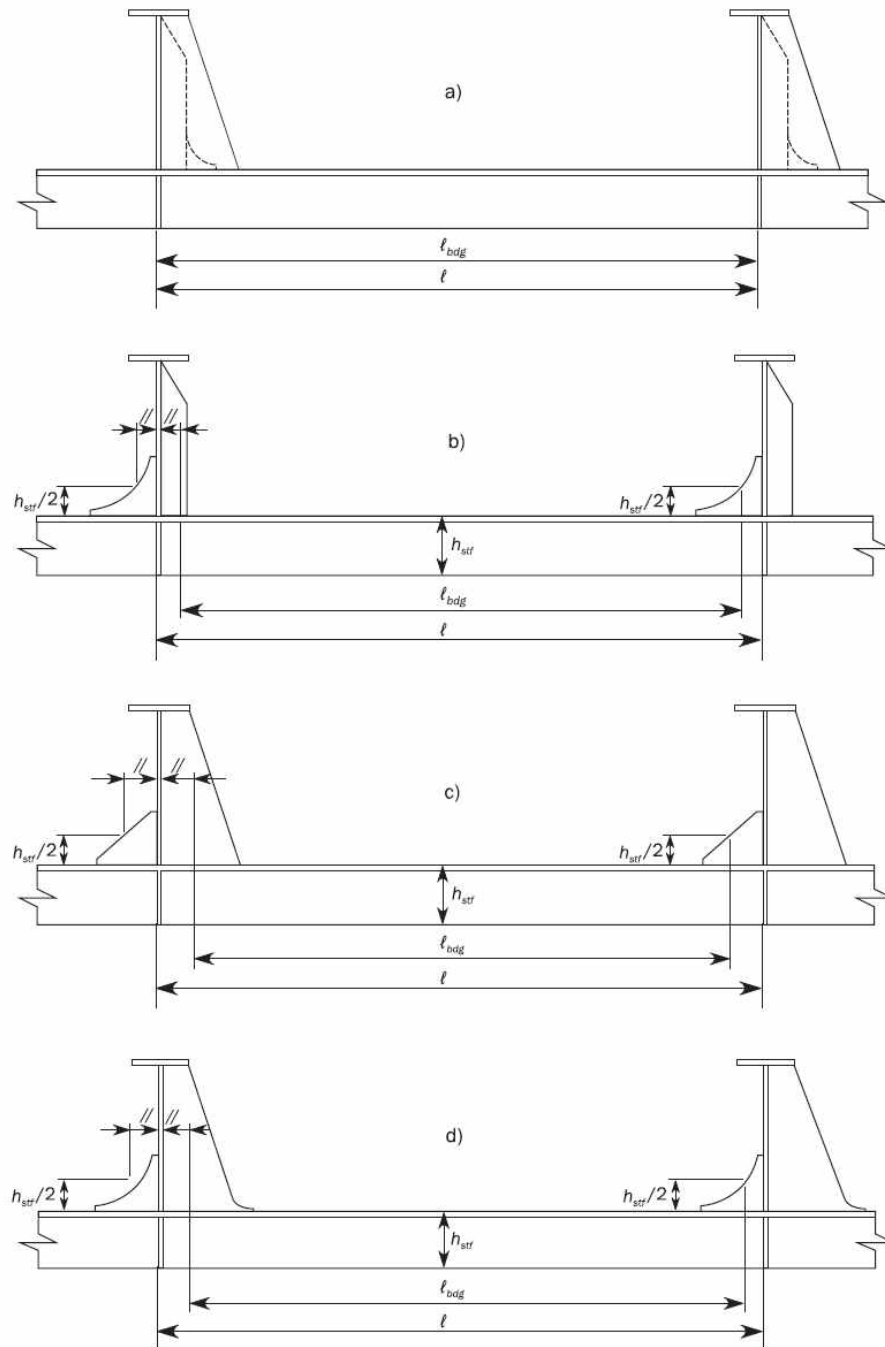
Effective bending span of stiffeners supported by web stiffeners (Single skin construction)
